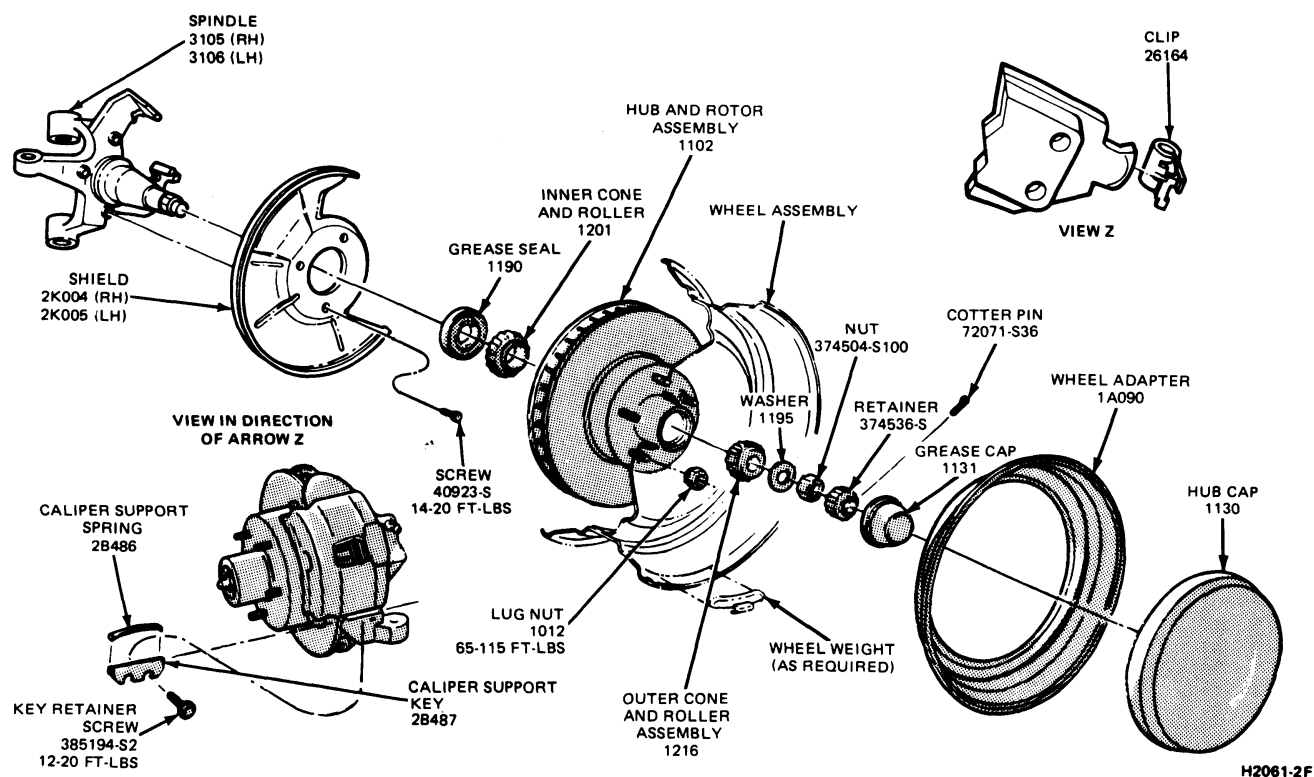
Sliding Caliper Disc Brake Installation—F-100-F-250, (6900 GVW), (4x2)
